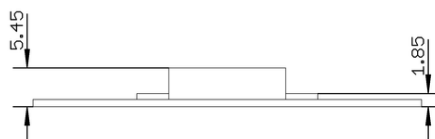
L5xxD-RGBxxxxy Mechanical Drawing
